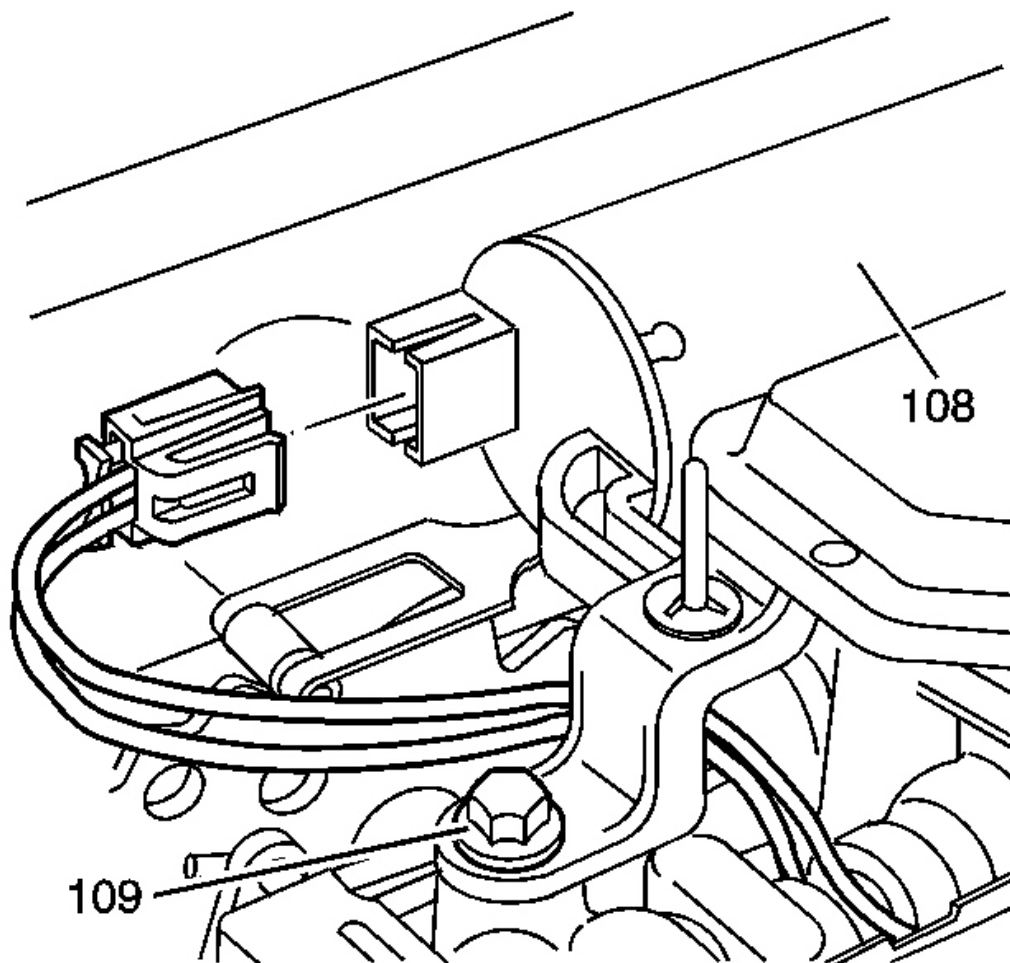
View Of Wiring Harness Connector For Secondary Fluid Pump
